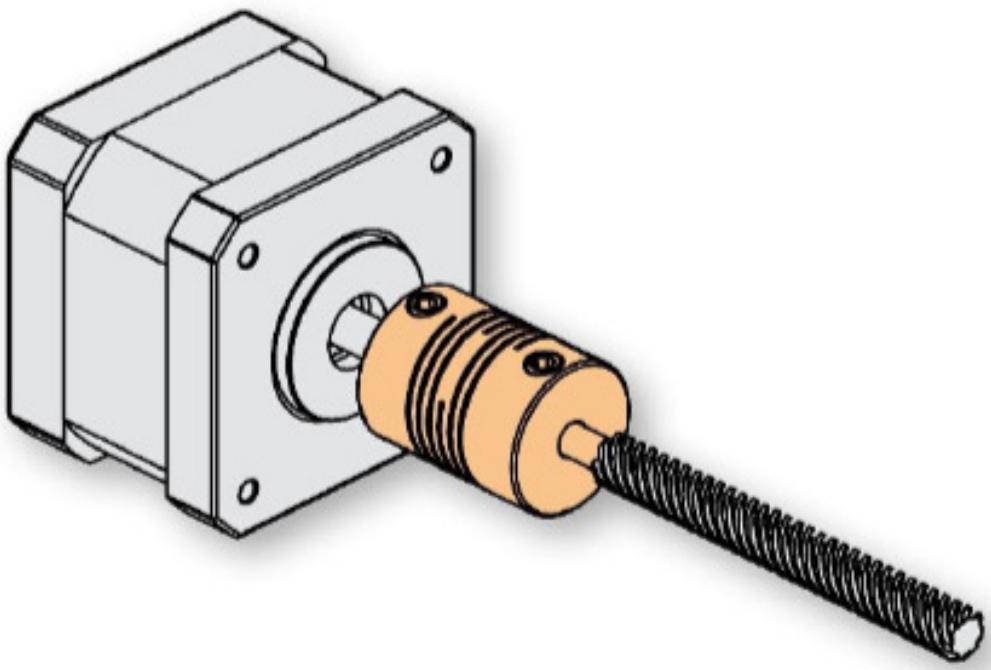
Sketch of the motor, coupling, and lead screw [61]
